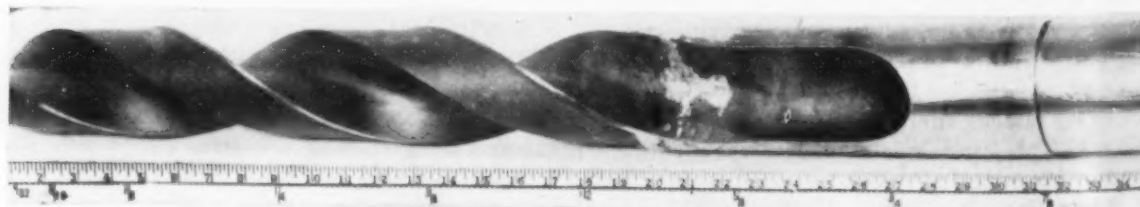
A three-inch drill successfully repaired by welding.
